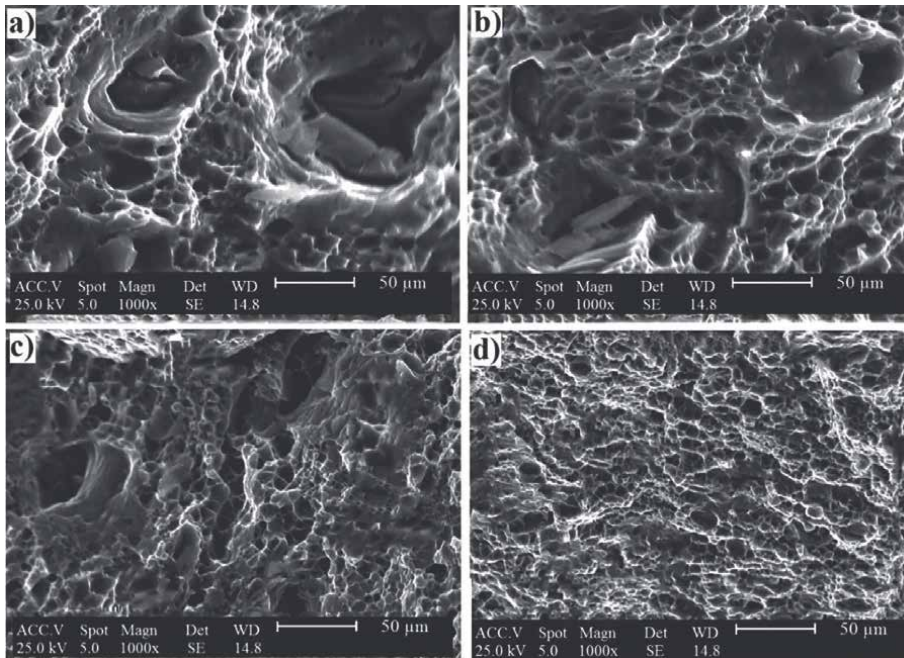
SEM fracture surface of a) FSV welded sample with PD: 2 mm, b) FSSV welded sample with PD: 2 mm, c) FSSV welded sample with PD: 2.5 mm and d) FSV welded sample with PD: 2.5 mm.
